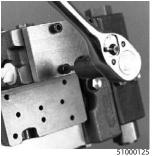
Remove EP•EQ Control Housing Screws
